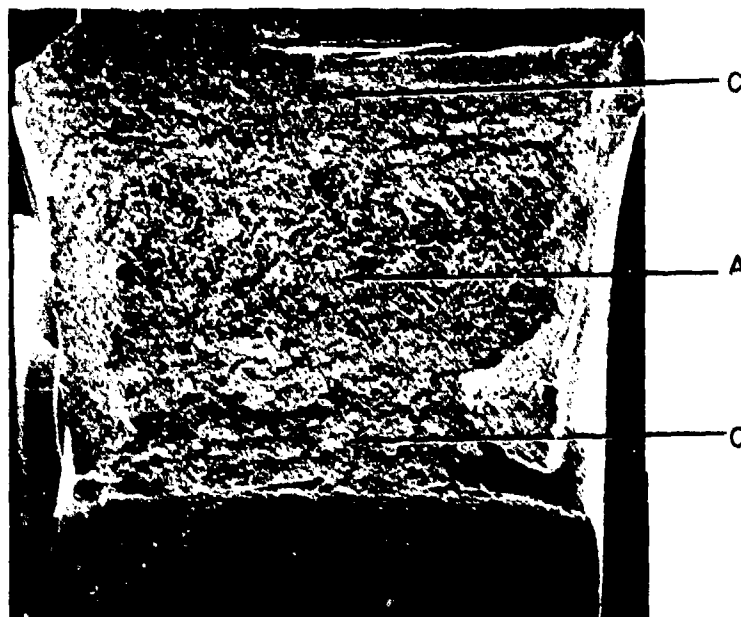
Fracture surface of an A-36 Charpy specimen tested at room temperature, 7x.
